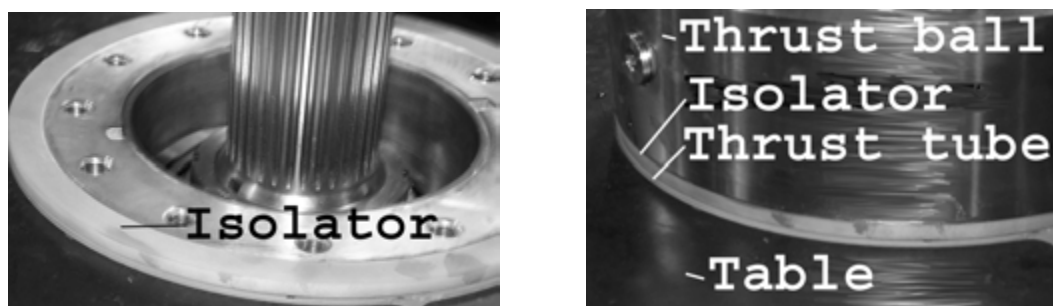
Place Isolator Over Thrust Tube (left), and Lower Thrust Ball Onto Thrust Tube (right)
